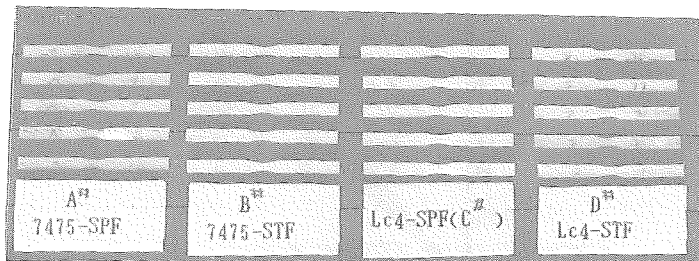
Fatigue Test Sheets of A' 7475-SPF
